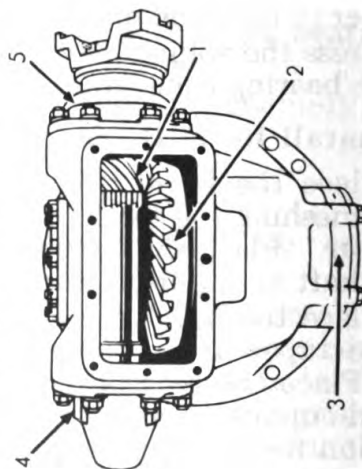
Inspection and Adjustment of Bevel Gear and Pinion Installation
